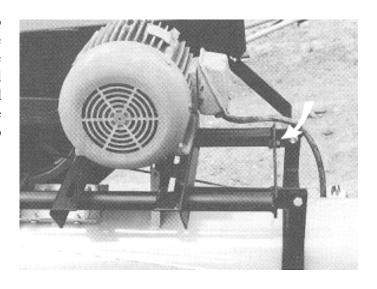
ELECTRIC MOTOR MOUNTING FRAME
